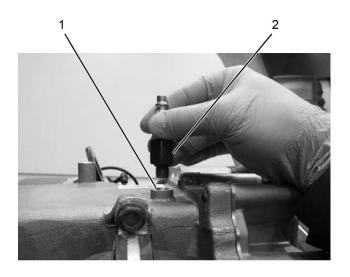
Installation of Cooler Plug, Large Plug Disc - Pop Off, and Double Hole Plate.
